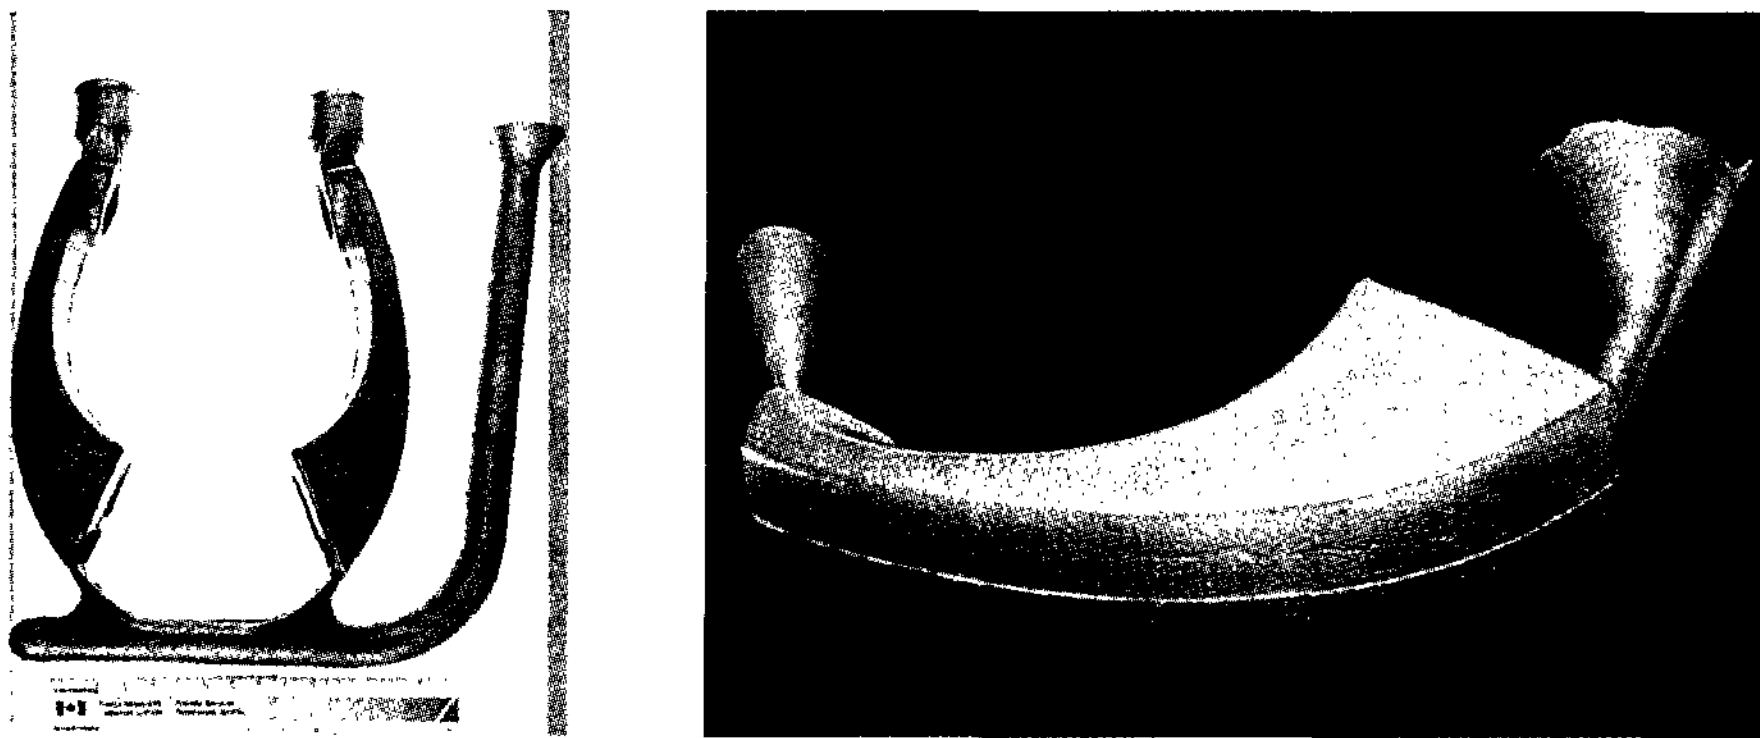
Photographs of the faucet castings with gating and risers (a) double faucet and (b) single faucet
